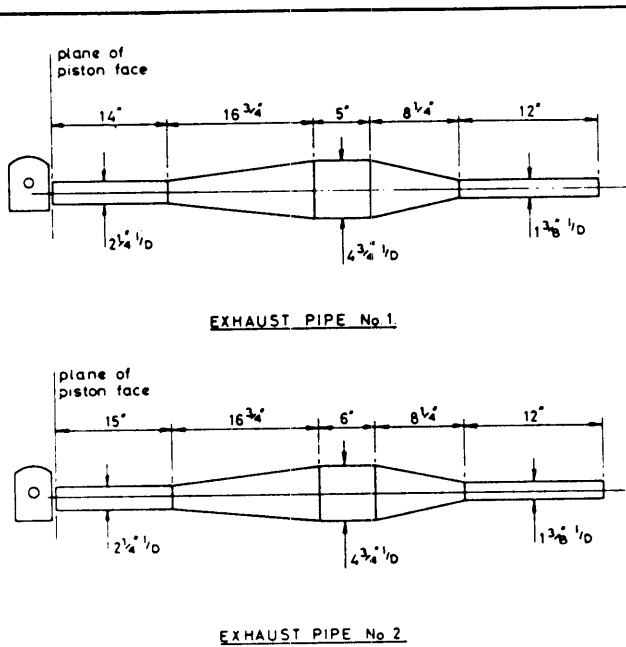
Dimensions of exhaust pipes 1 and 2
